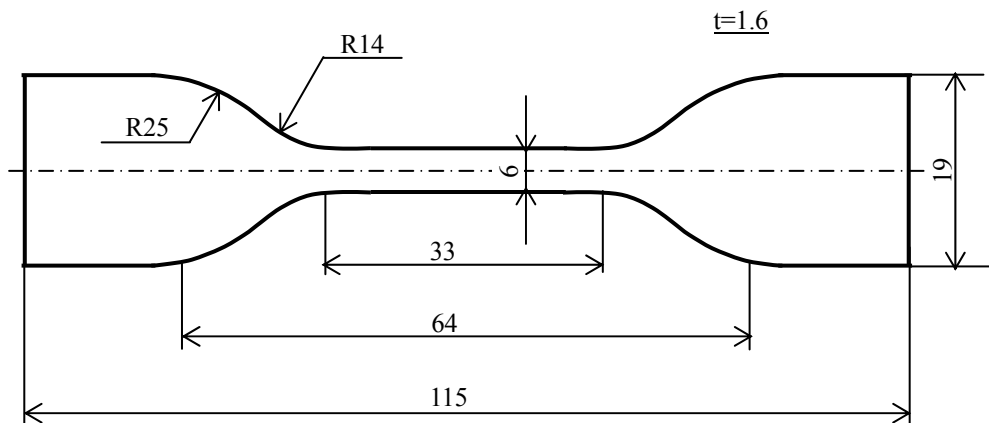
Type IV specimen dimensions specified in ASTM-D638 (mm)
